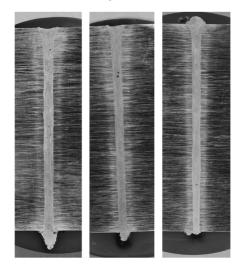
Cross sections of welded joints: 1 – Sample No.1, 2 – Sample No.2, 3 – Sample No.3
